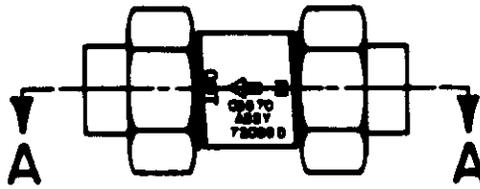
Fitting End Adapter 37° Flared X 0.25 I P S Socket Weld
